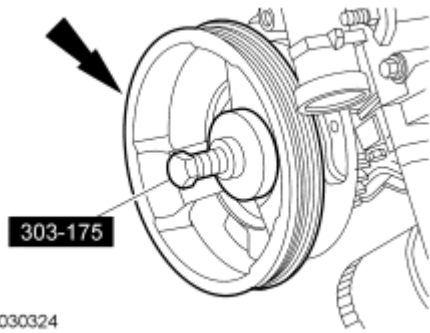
Installing Crankshaft Pulley Using Special Tool (303--175)
